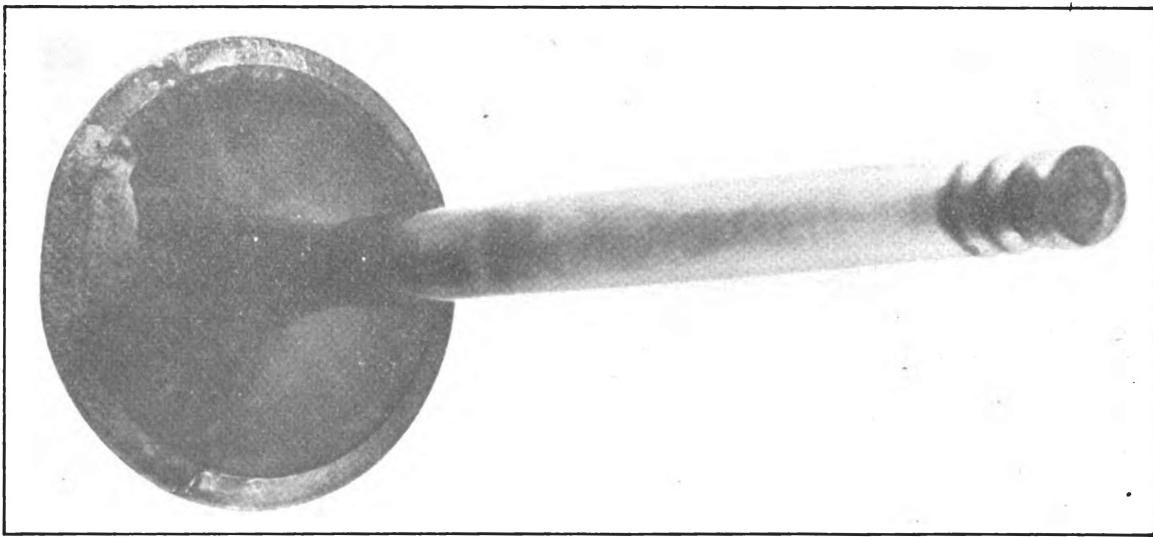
Burnt exhaust valve No. 6 L cylinder after running 38 hours.
